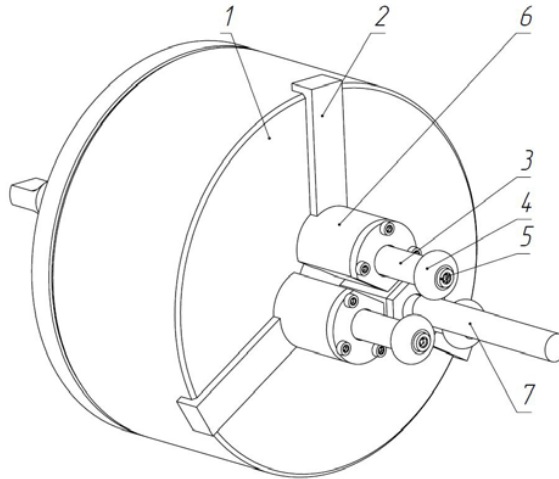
Design of the device for implementing TMP of the rotary cutting tool
